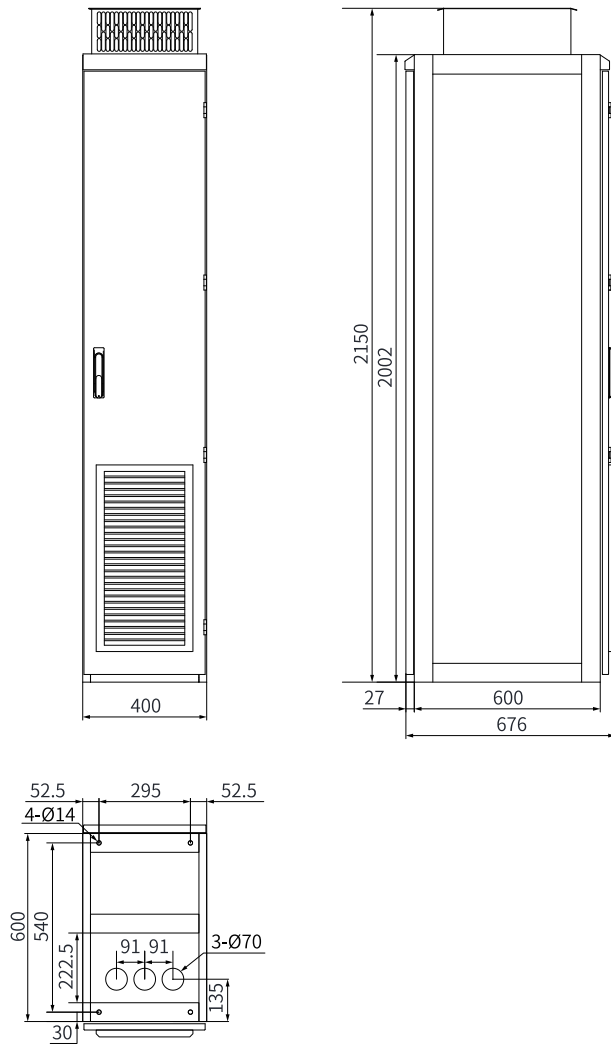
400-mm wide H6/H7 drive cabinet (mm)
